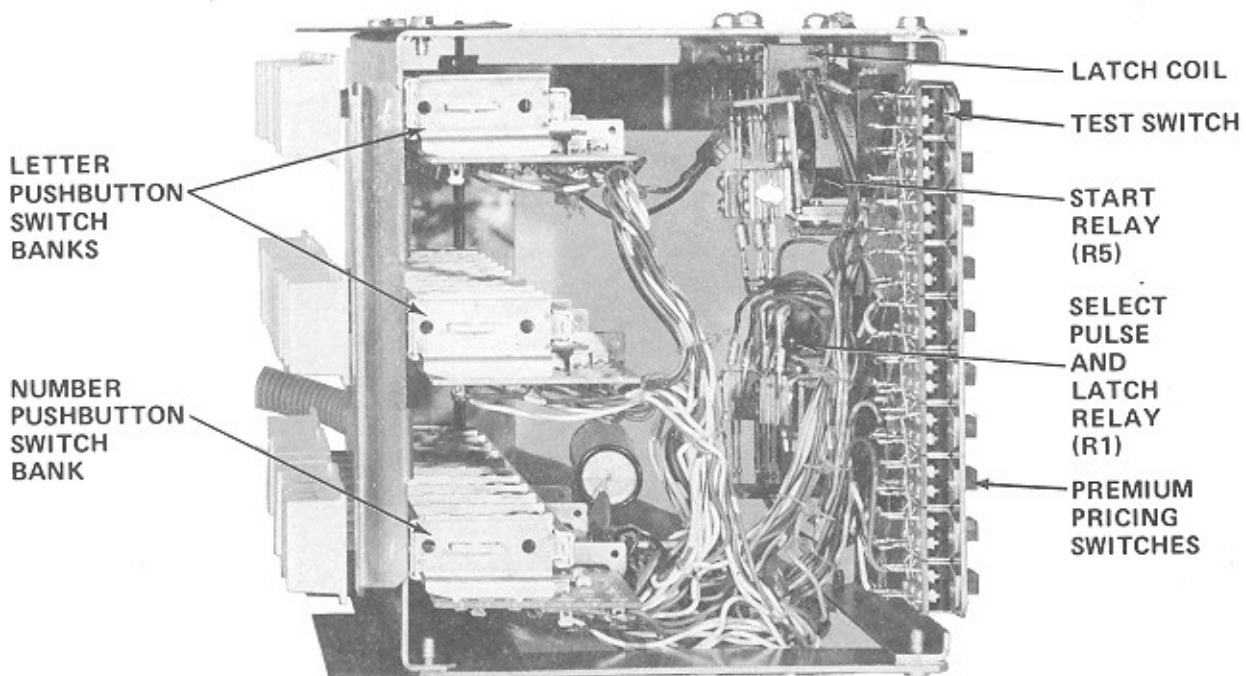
SELECTOR ASSEMBLY COMPONENTS
